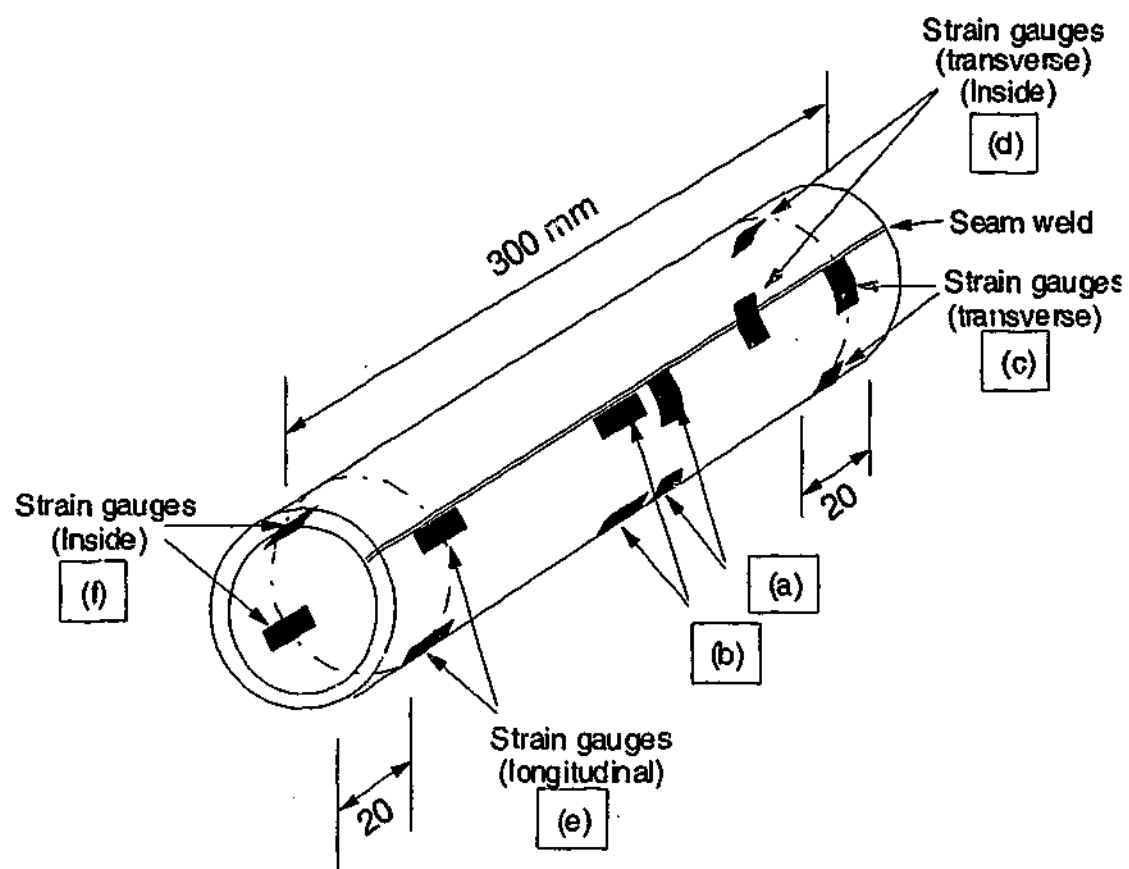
Positions of strain gauges mounted on NHT tube
